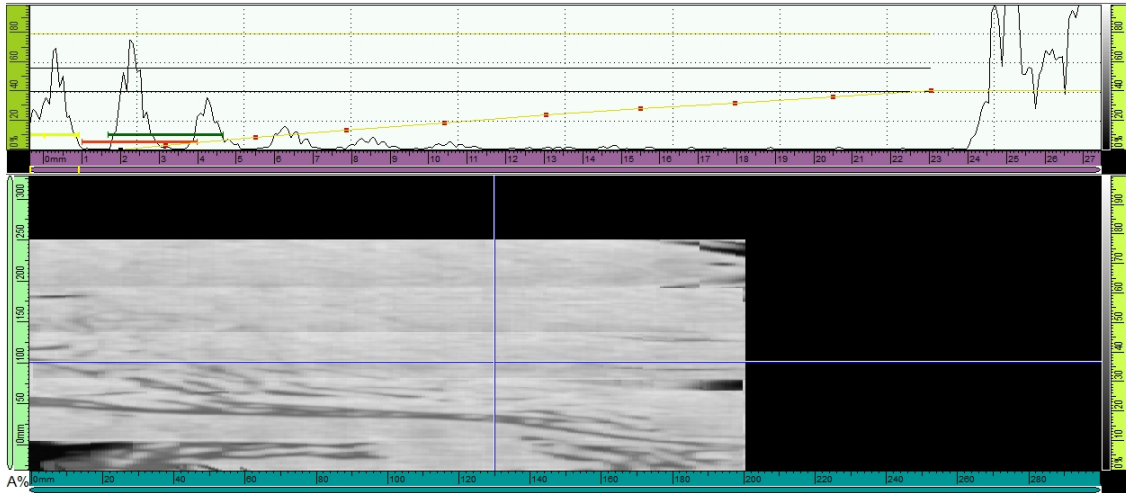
C-scan taken of the inspection area between the sensors after blind QSI of 15.5mm.
